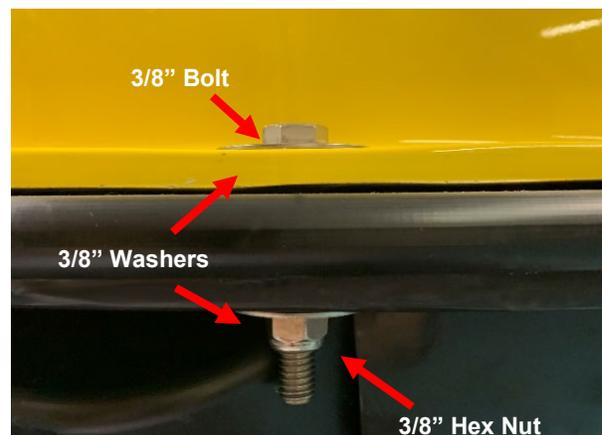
2050-DSS Bolt Hardware Assembly
